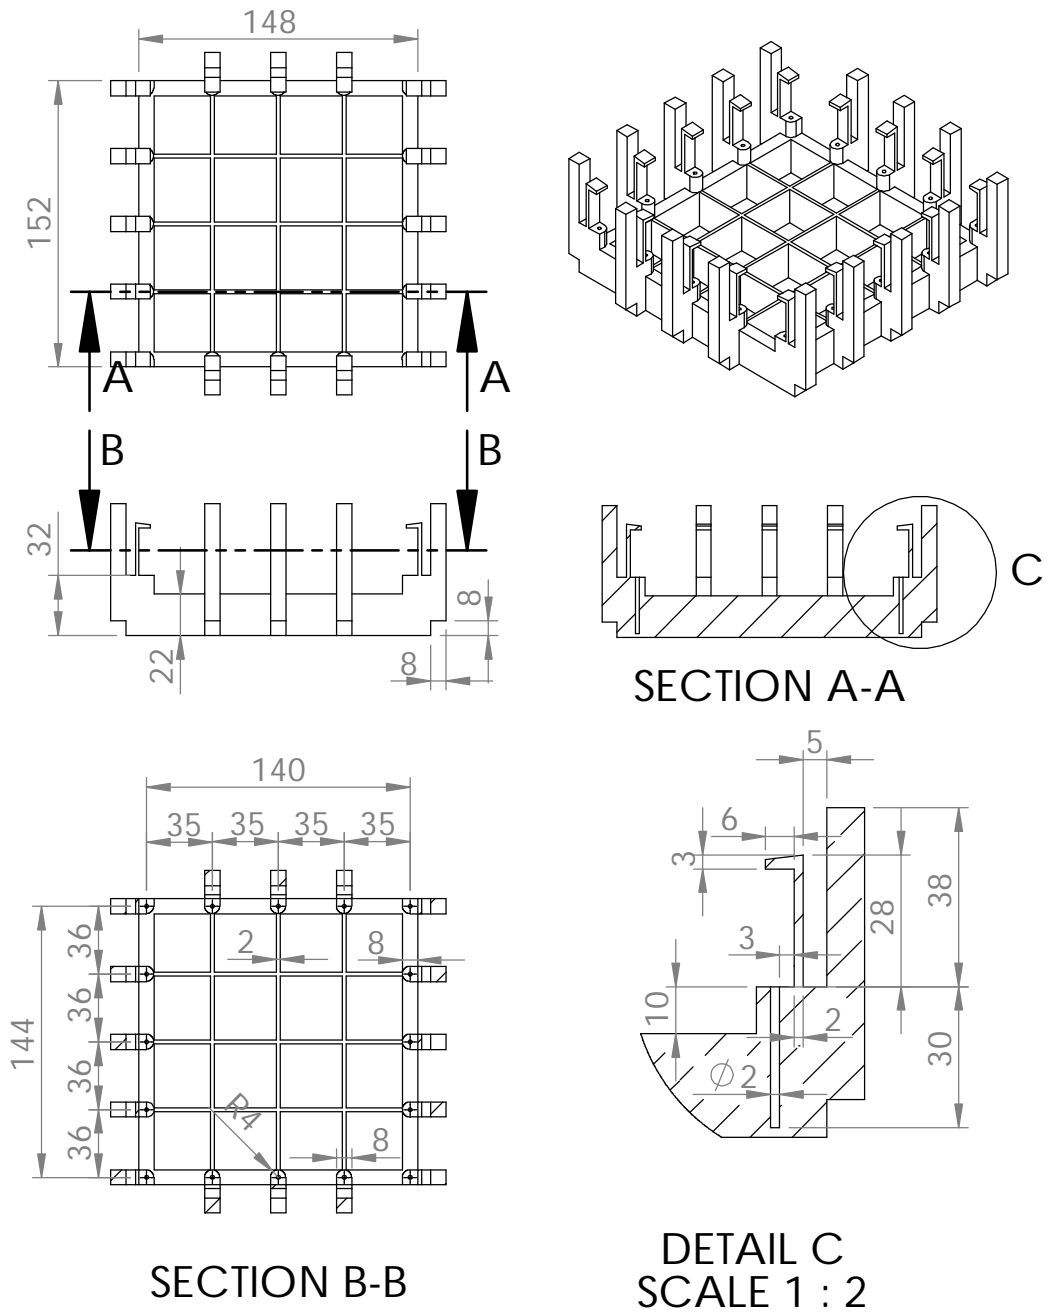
CAD drawings of the final frame design. Scale is 4:1.
